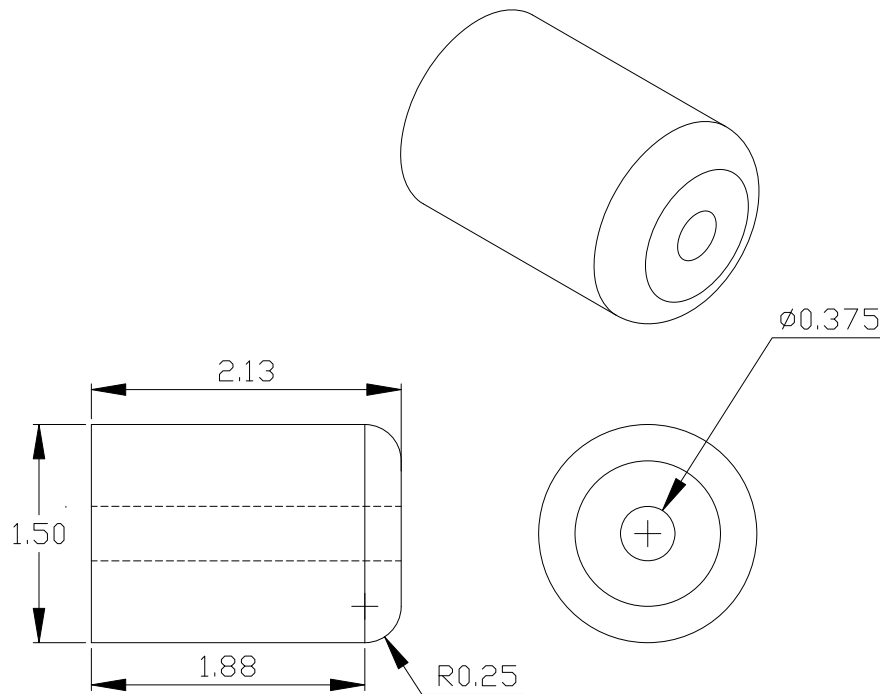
Aluminum alloy grip support plug inserts with nominal dimensions in inches
